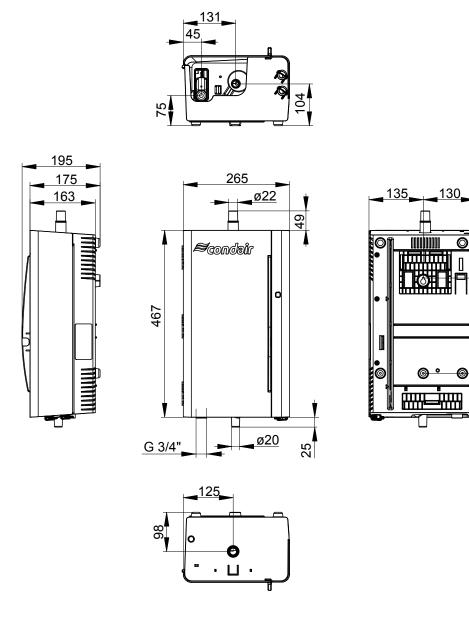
Dimensional drawing Condair RH (dimensions in mm)
